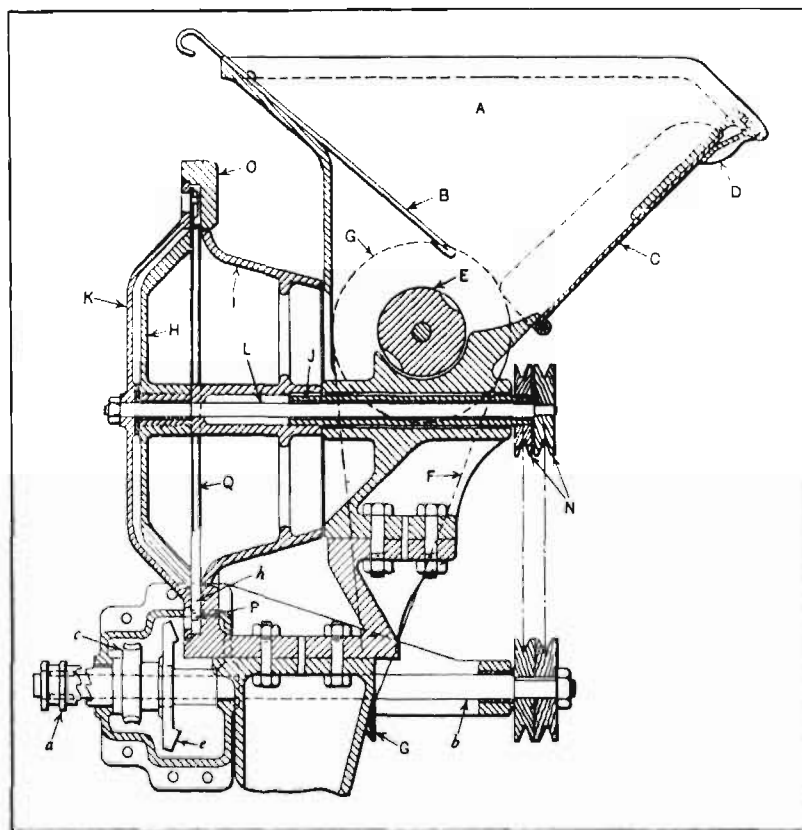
Cross-section through hopper and driving members of bottle-cap feeding mechanism shown in Fig. 13.
